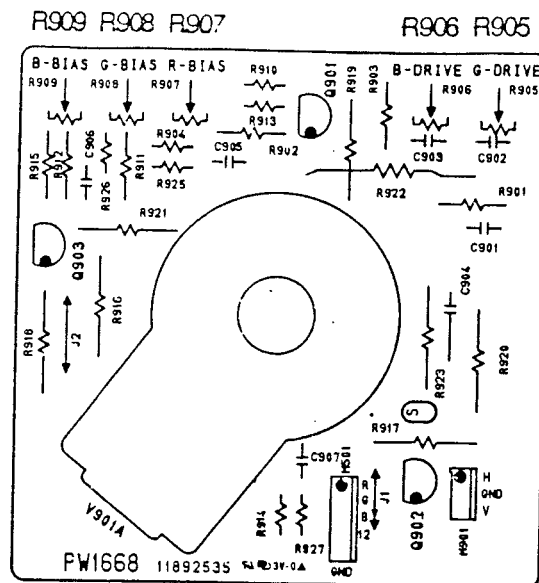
Chassis Top view (CRT Socket P.C.Board)
